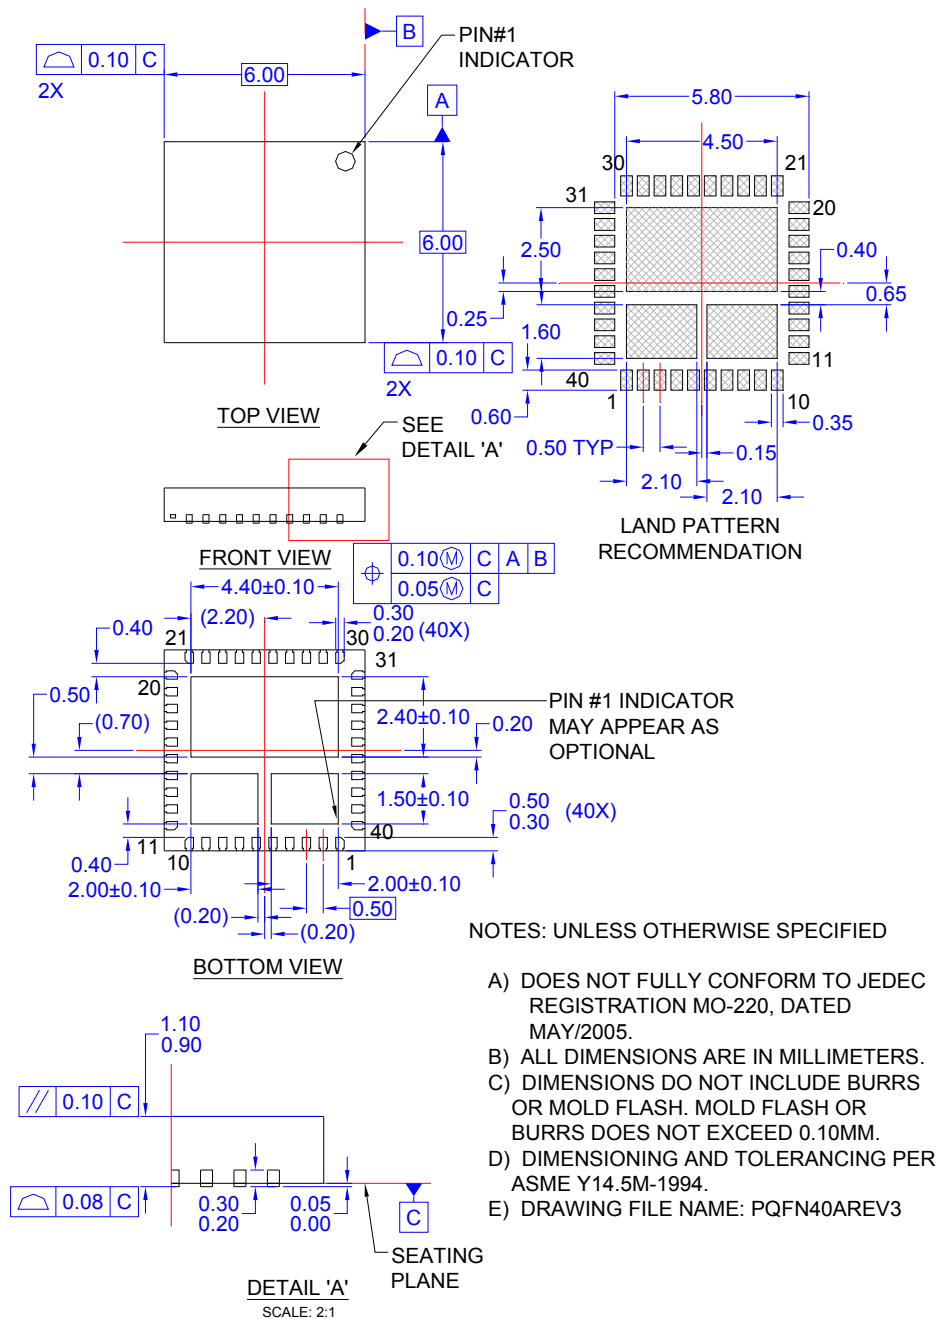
40-Lead, Clipbond PQFN DrMOS, 6.0x6.0 mm Package
